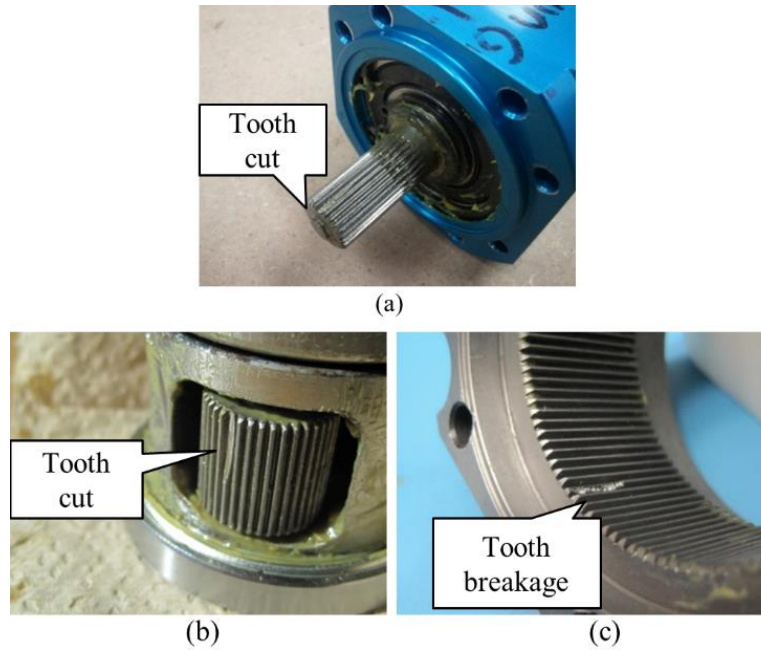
Seeded faults: (a) sun gear fault, (b) planet gear fault, (c) ring gear fault.
